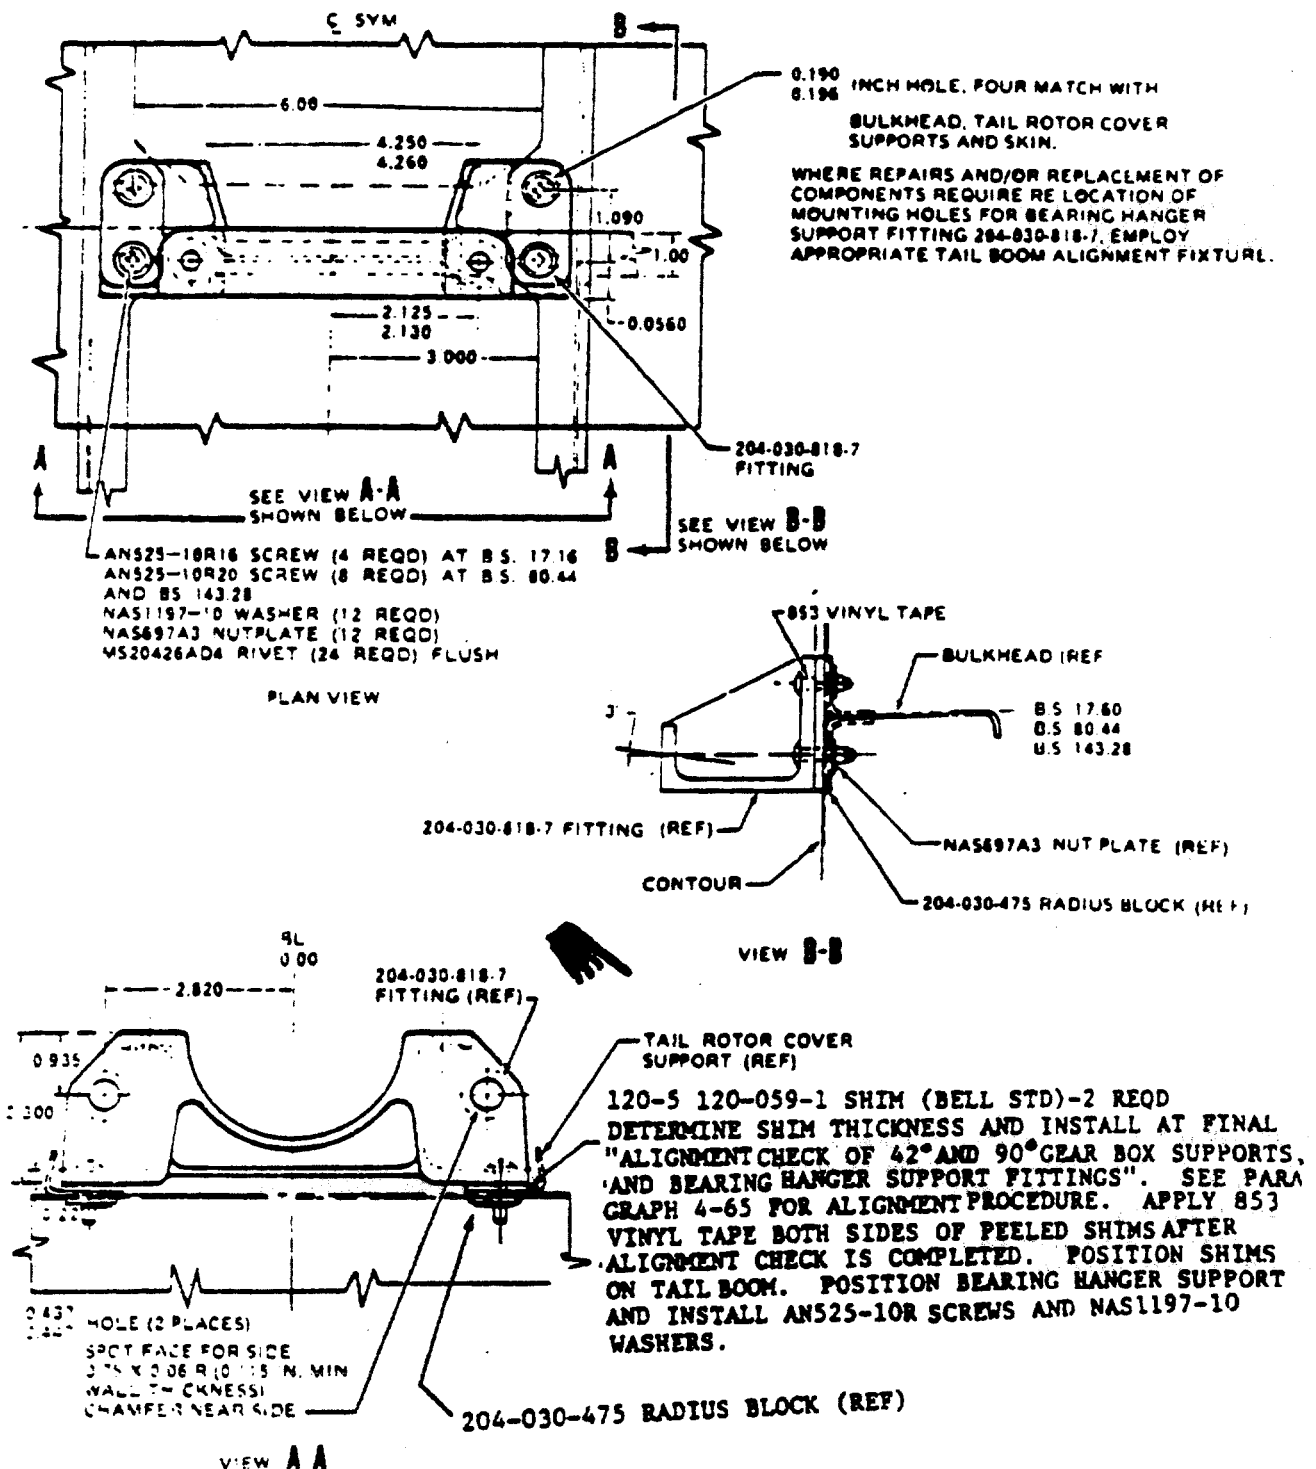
DAMAGED HANGER BEARING SUPPORT HOLES (SHEET 1 OF 2)
